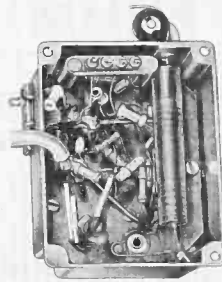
Bottom View of FM Tuner Sub-chassis. Location of components shown.
